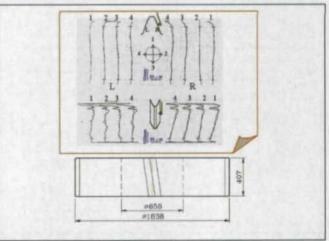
Tooth profile and lead of a gear from Figure 11 before carburizing.
